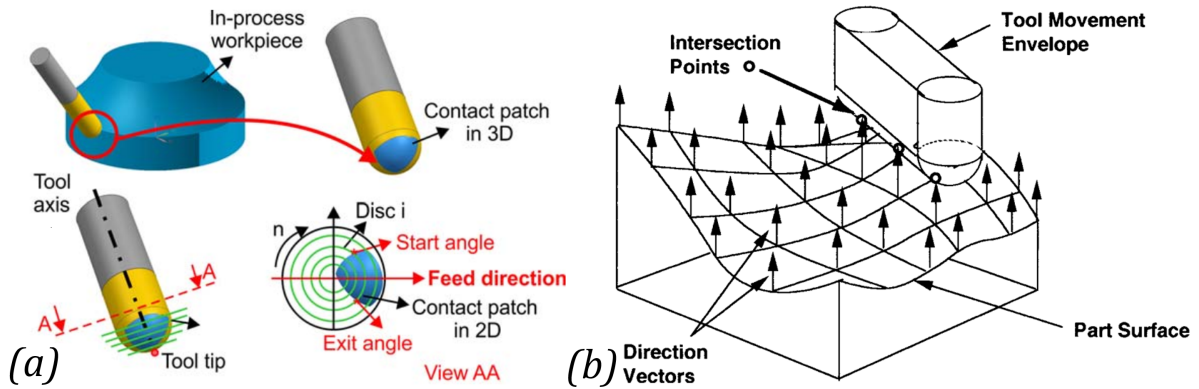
(a) CWE calculation in 5-axes milling using BREP [25], (b) Representing the workpiece geometry using the Z-buffer method [26]
